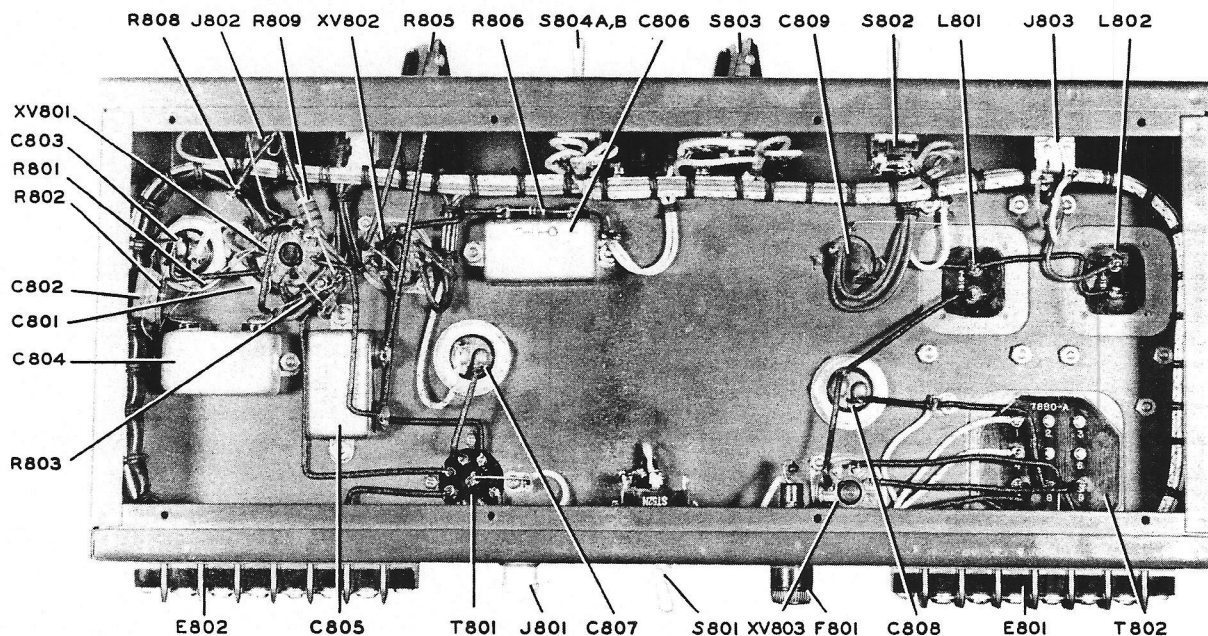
Type 177L-2 Remote Control Unit, Parts Arrangement - Bottom
